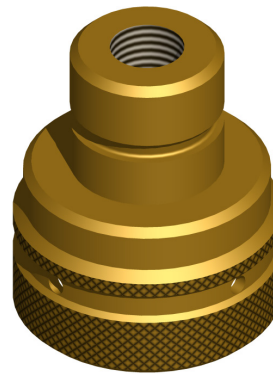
Pneumatic Actuator (Part No. 304.209.004)
